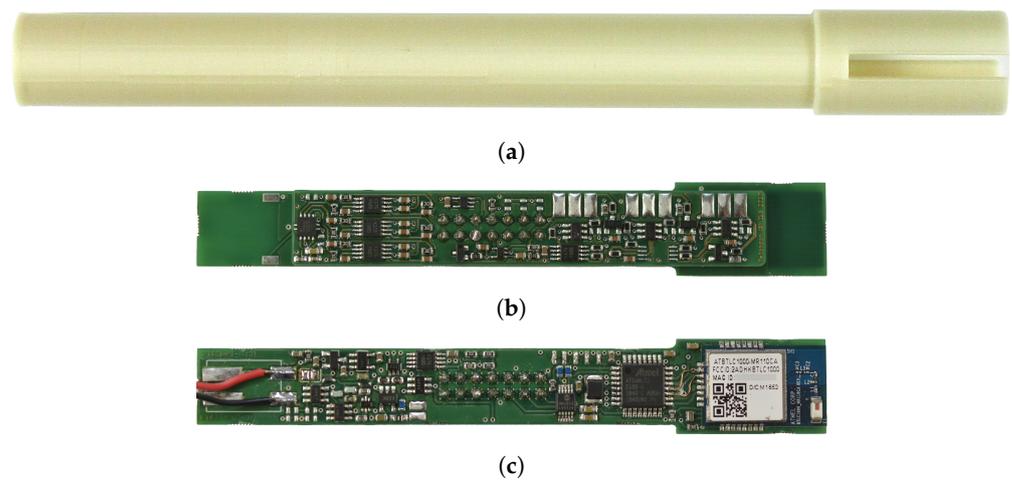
Printed circuit boards and mounting sleeve. (a) Mounting sleeve; (b) Measuring board; (c) Signal processing board.
